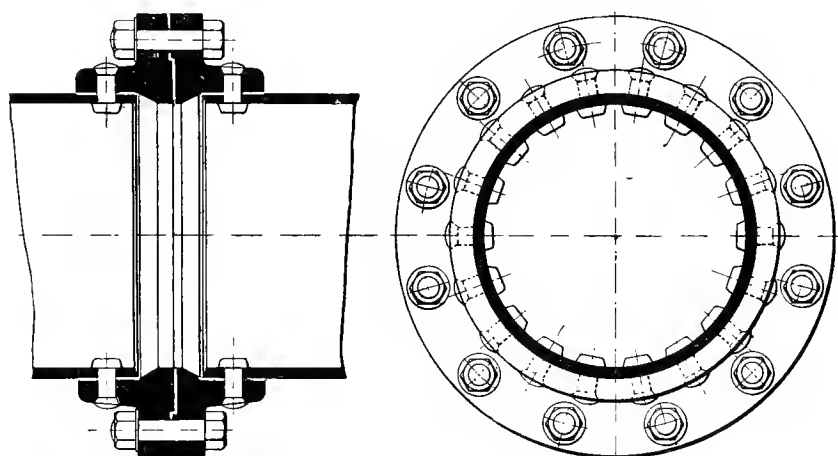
RIVETED FLANGE (YATES & THOM).
